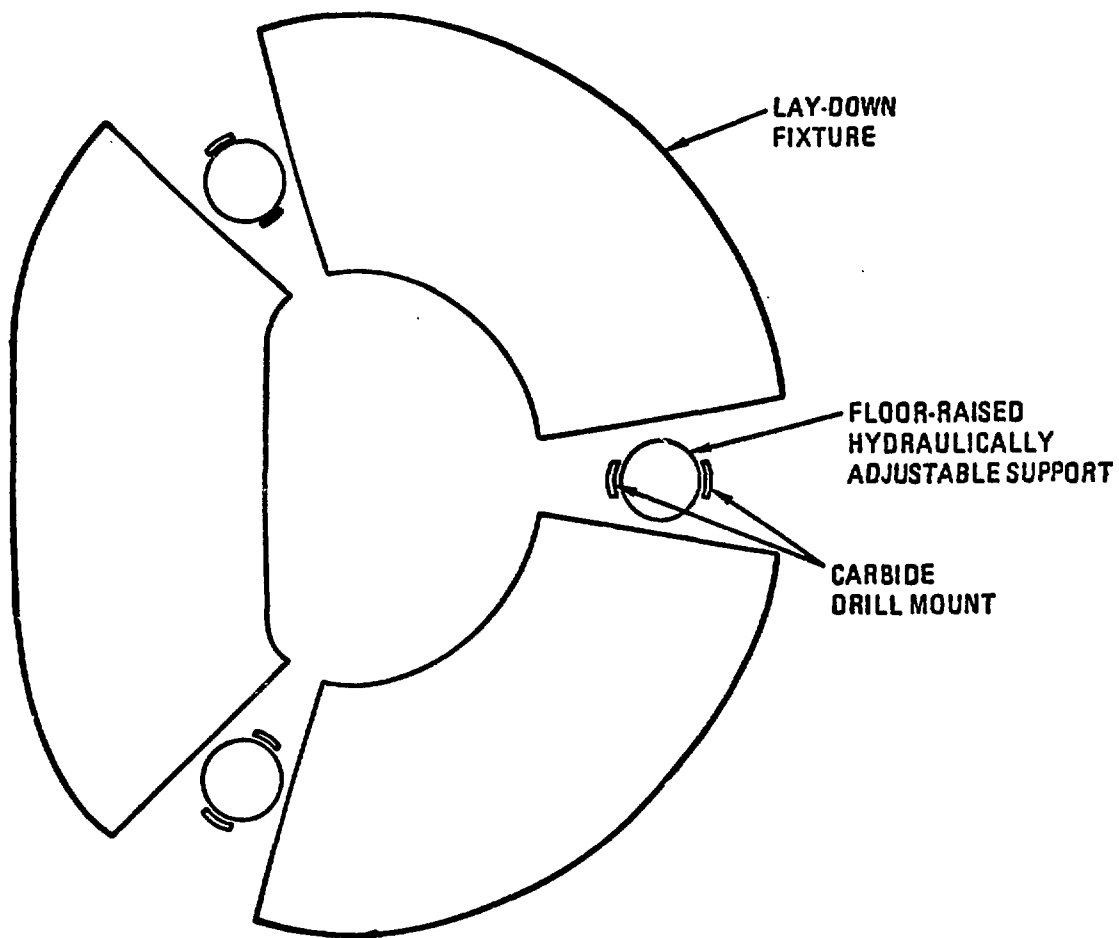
Discontinuous lay-down fixture showing carbide drill mounts and floor-raised hydraulically adjustable support.
